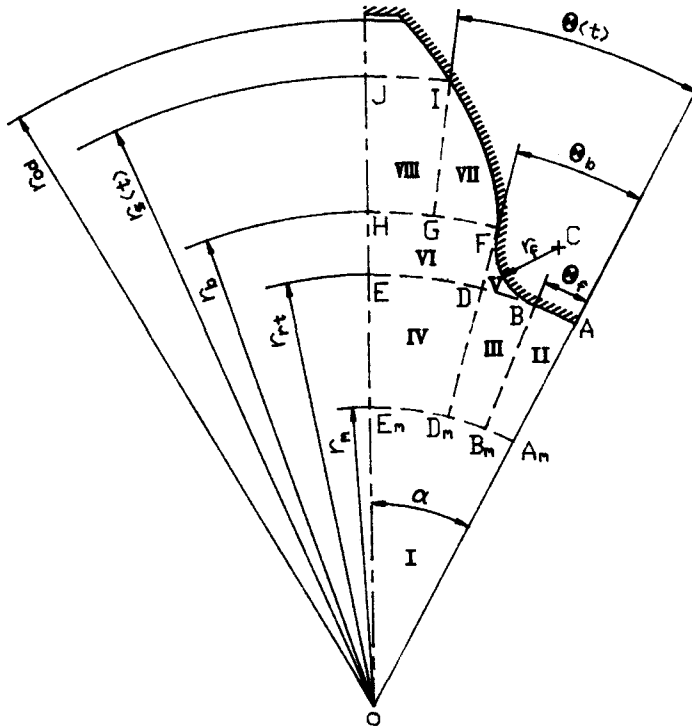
Assumed deformation regions for the closed die forging of the involute spur gears.
